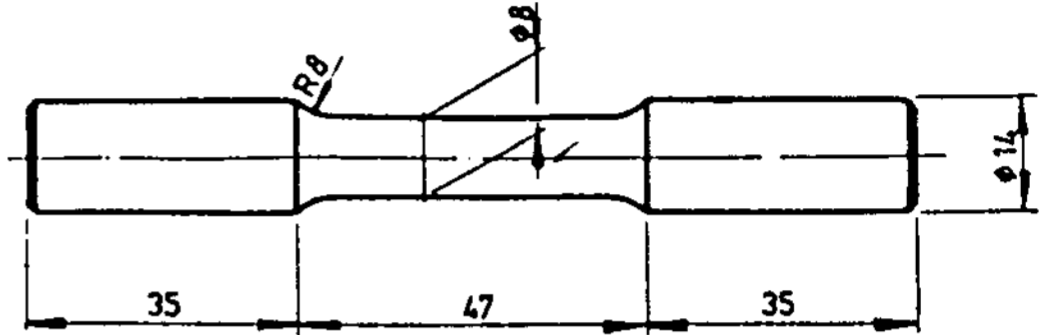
Dimensions of tensile test specimen (unit, mm)
